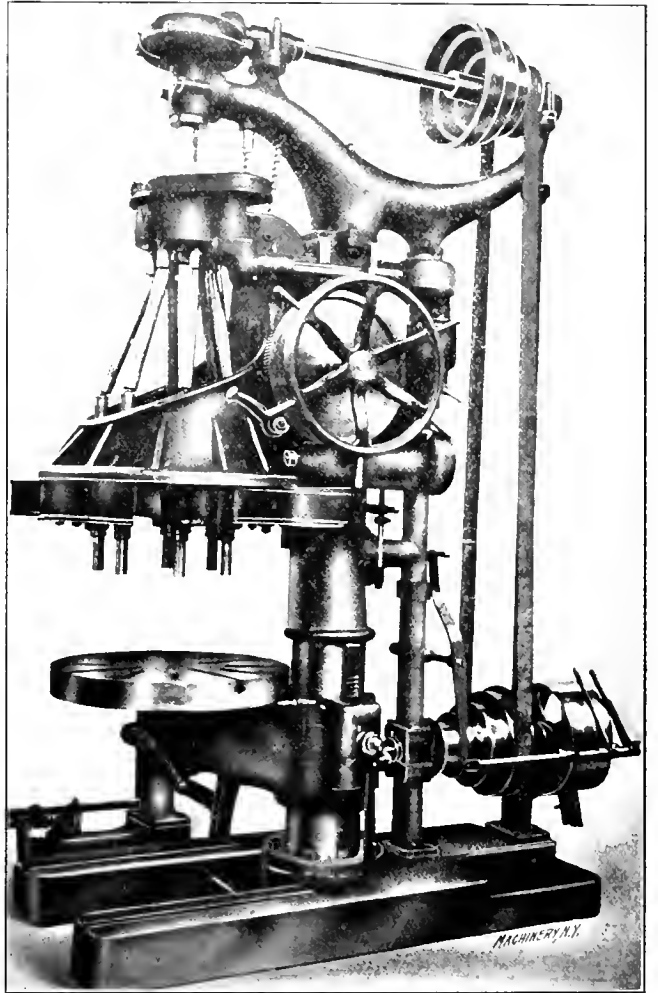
Heavy Multiple Spindle Drill of Universally Adjustable Type.
